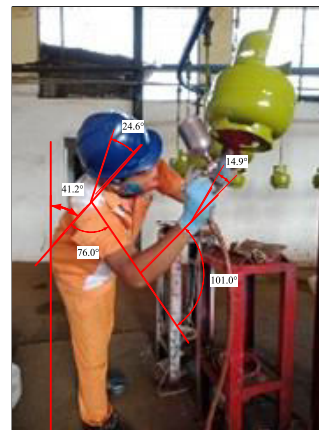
Assessment of Body Posture for Printing at the Bottom of the Tube
